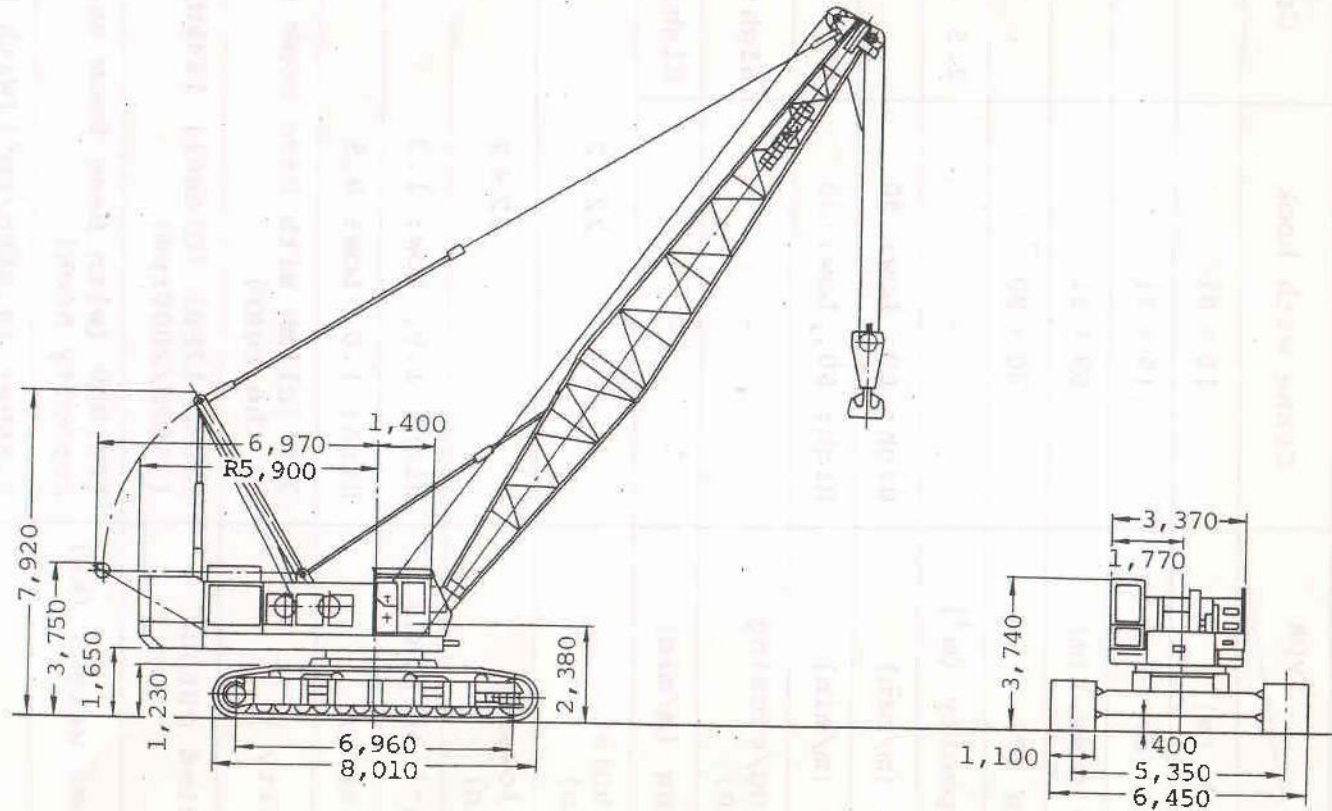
KH700-2 Crawler Crane-Dimension
